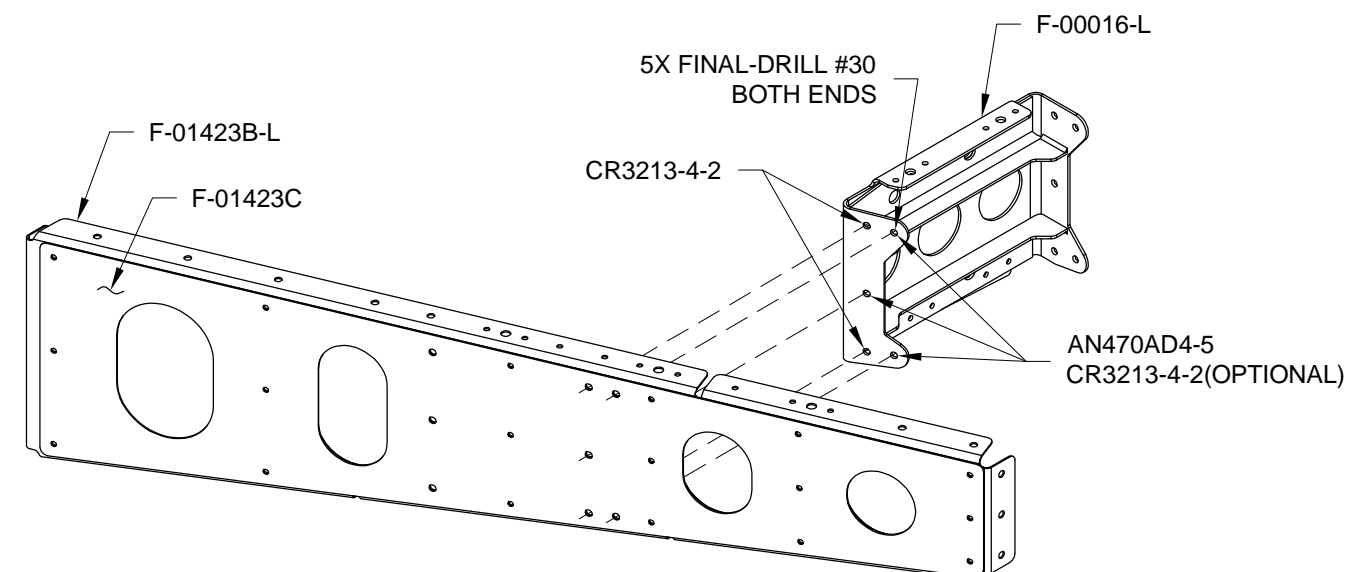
LEFT STEP ATTACH ASSEMBLY
